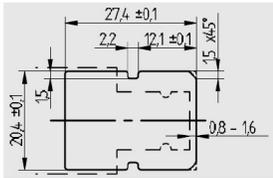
Fortimo InstantFit system - Zhaga compliant connector cutout dimensions.
